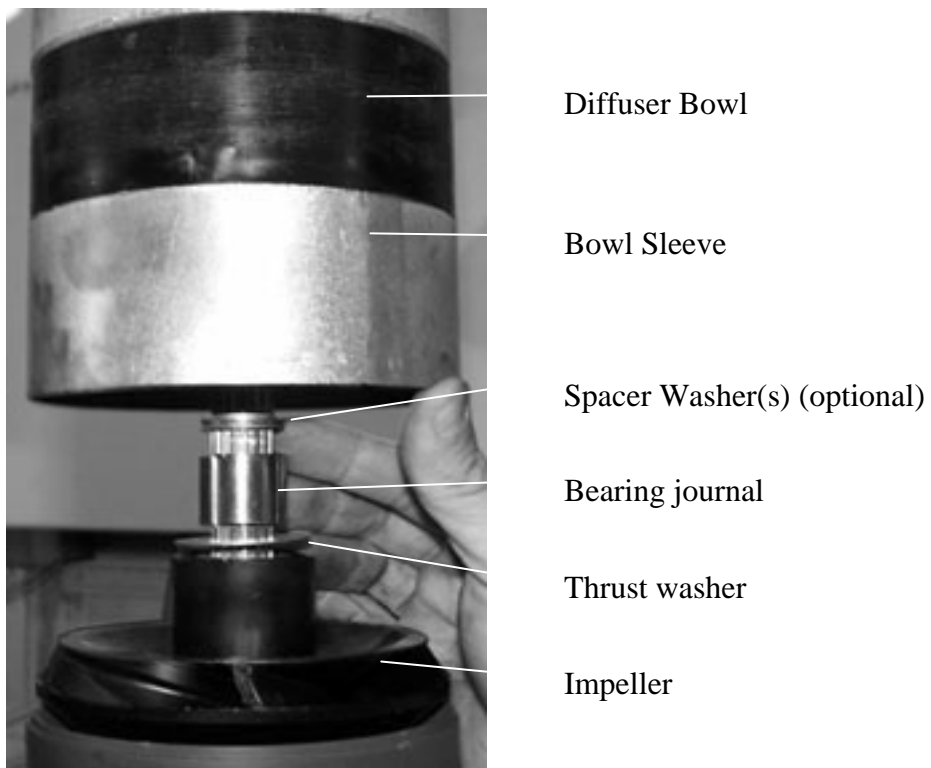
Complete Stage Assembly for 2400-Series Pumps
